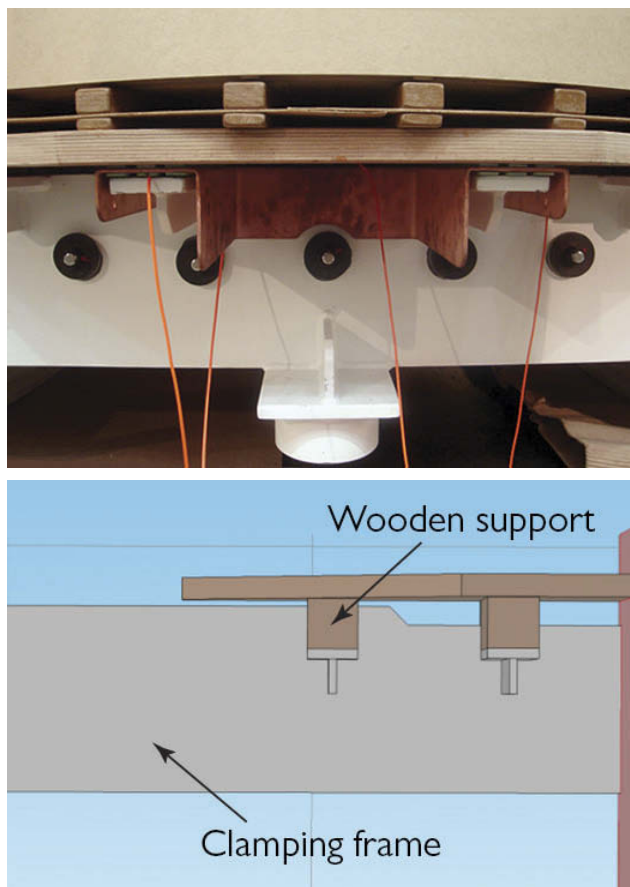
Top: Original clamping frame design with copper shielding. Bottom: Optimized clamping frame design using less materials.
